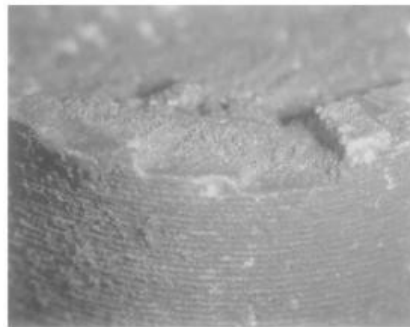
The edge of the fracture surface of the valve stem
